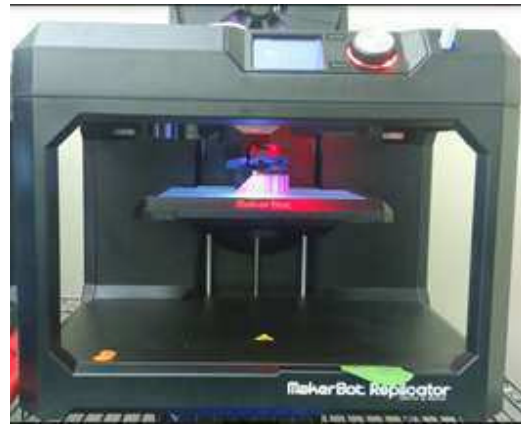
Makerbot Replicator 5th gen. FDM 3-D printer.
